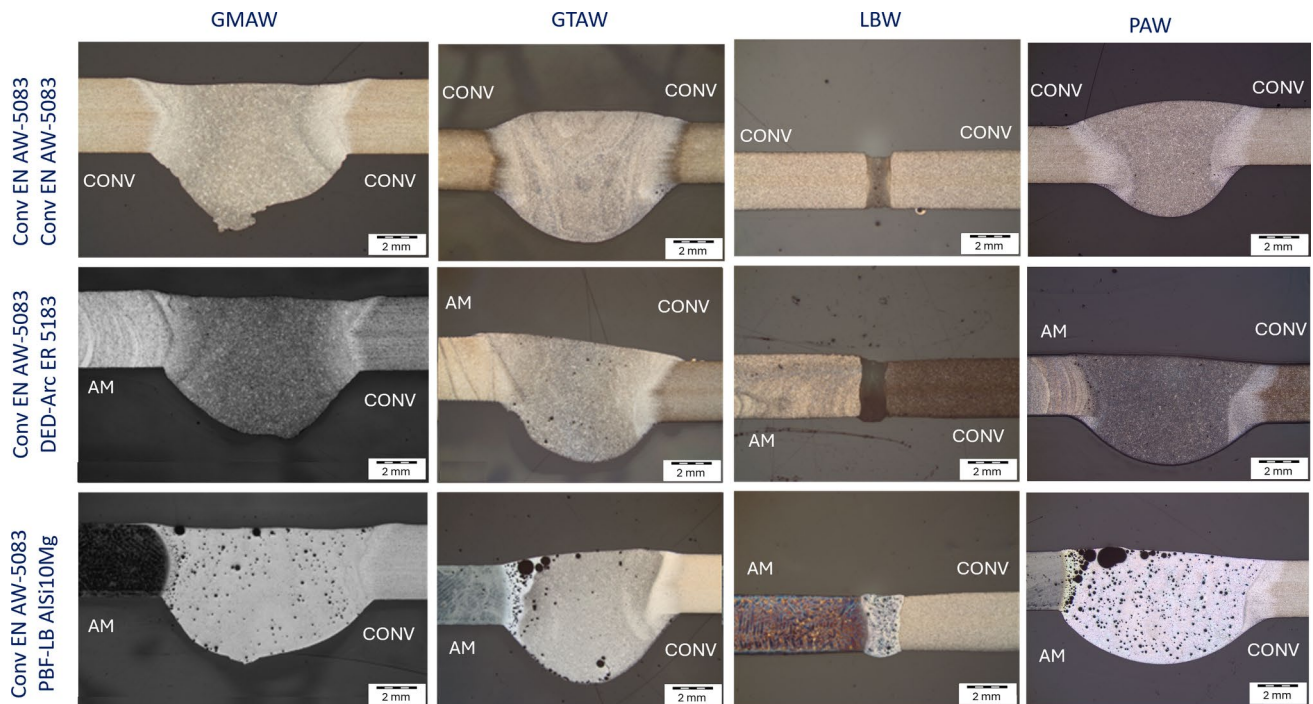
Cross-section of welds performed by fusion welding processes GMAW, GTAW, LBW, and PAW
